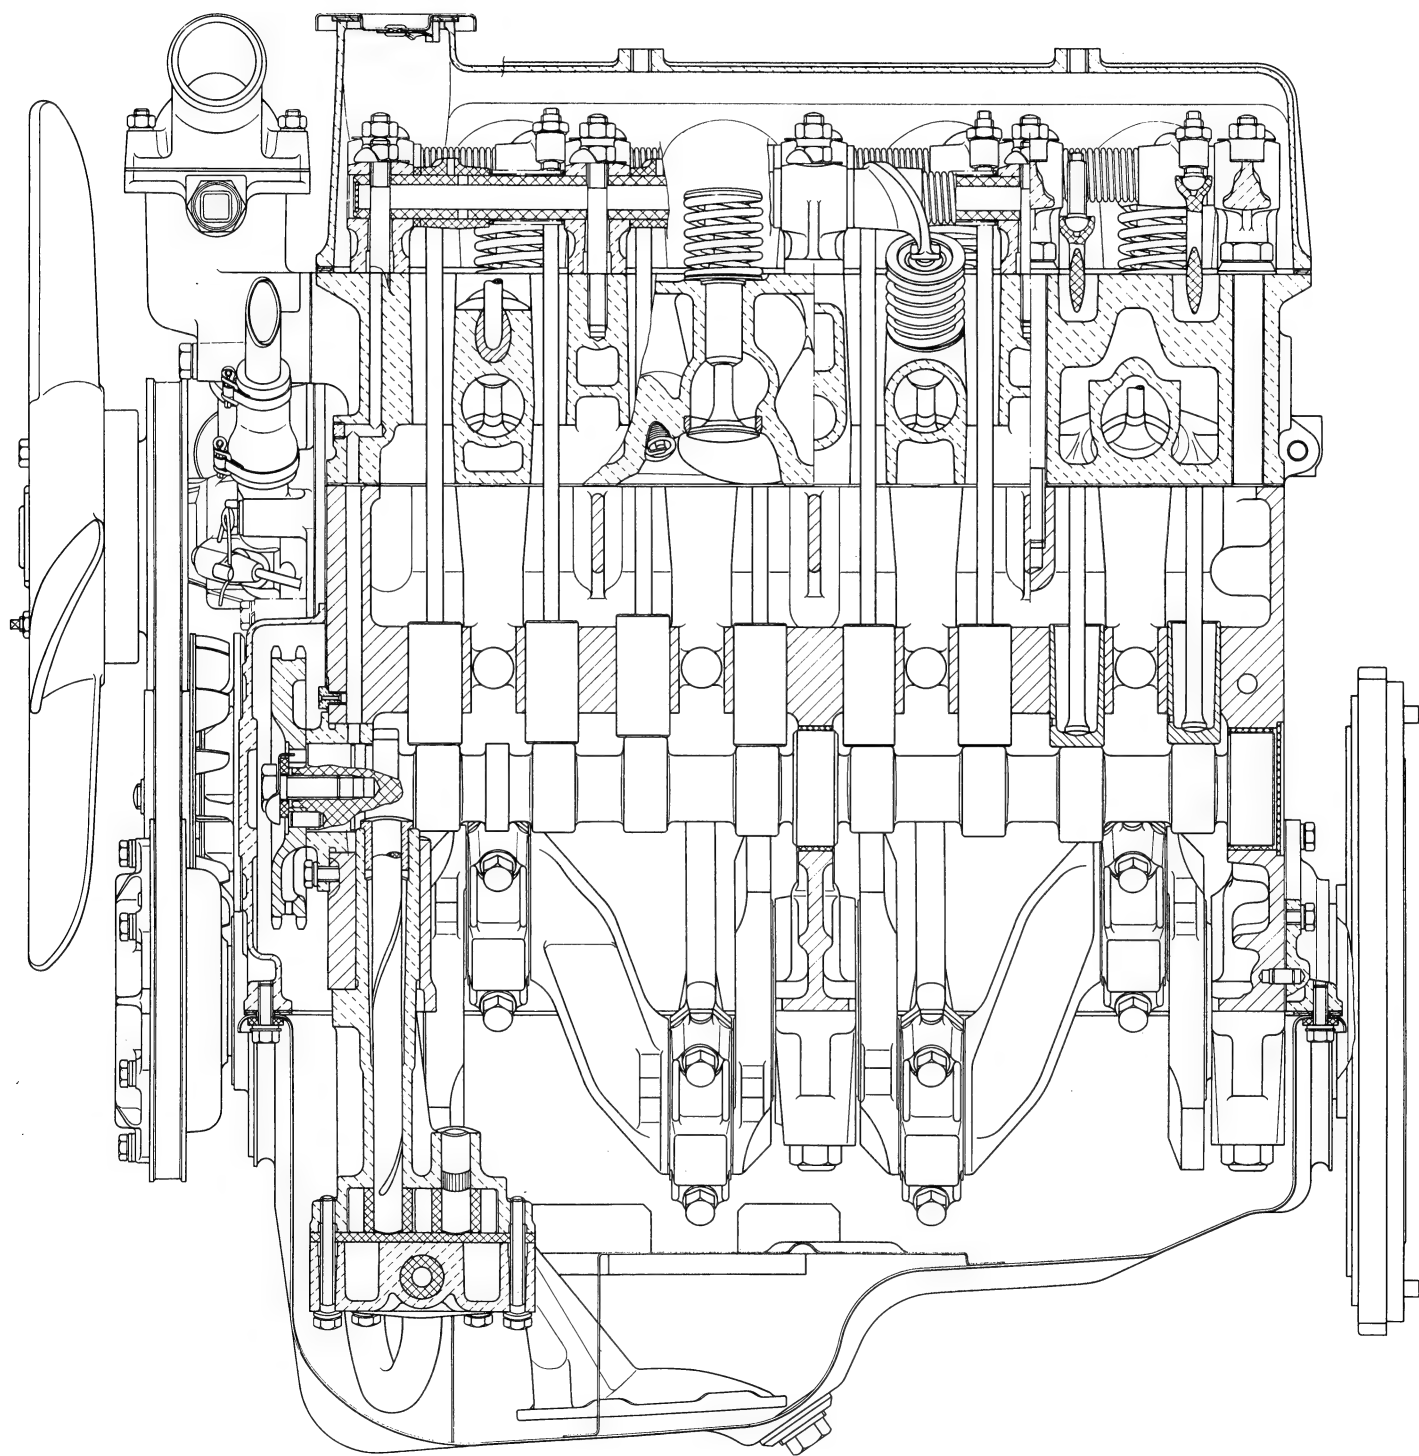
Side sectional view of engine 115 C.005 across camshaft, rocker shaft and oil pump.
